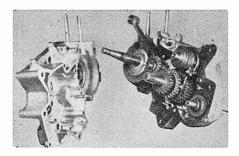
View of the crankcase halves separated. Shaft and gears should be in the right side.
